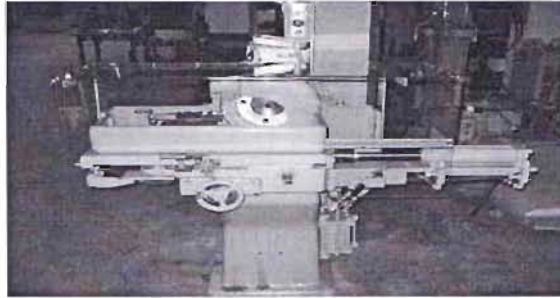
Chaser machine (www.rebuildersunlimited.com)
